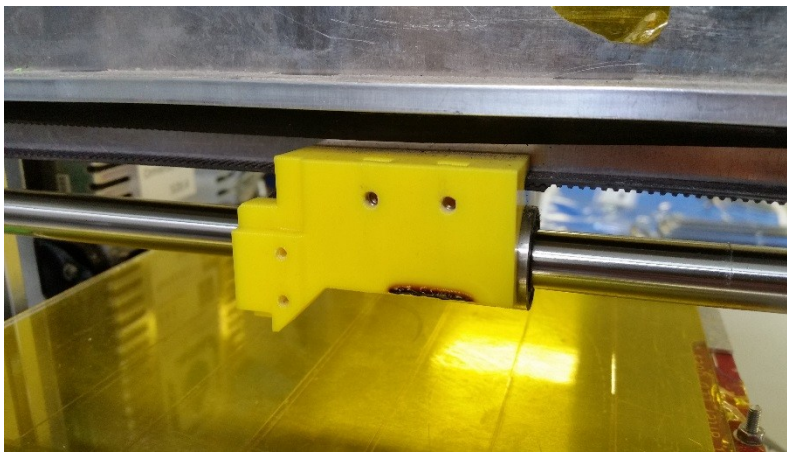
Bare x-axis carriage with hot end, infrared sensor board, and nozzle mount removed.
